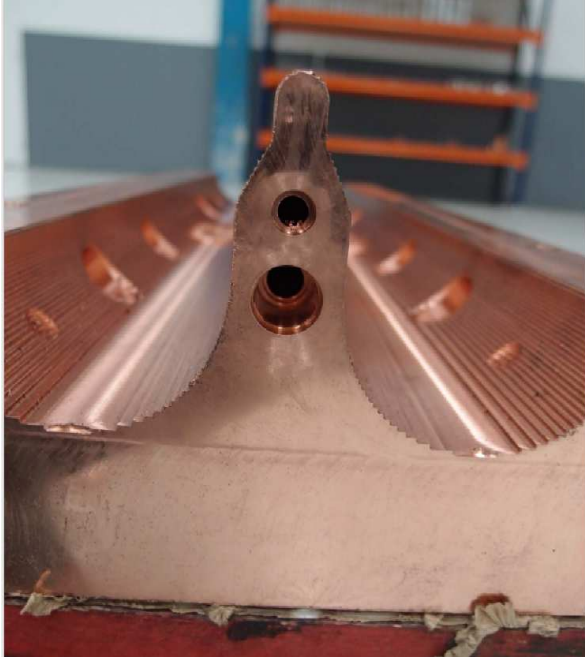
A major vane after rough machining. The holes of the cooling channels can be seen in the vane.
